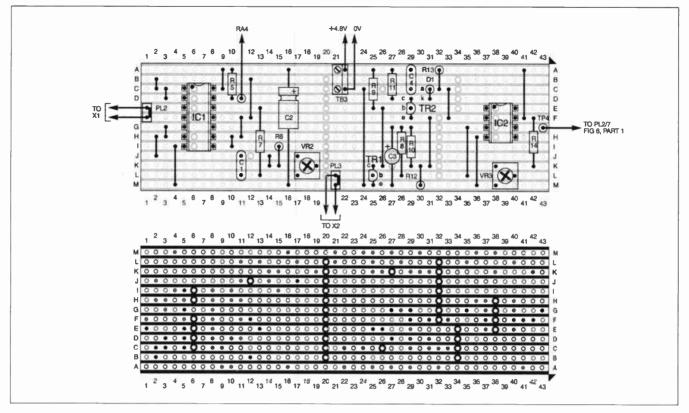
Layout of components on the Ultrasonic Transmitter/Receiver board.
